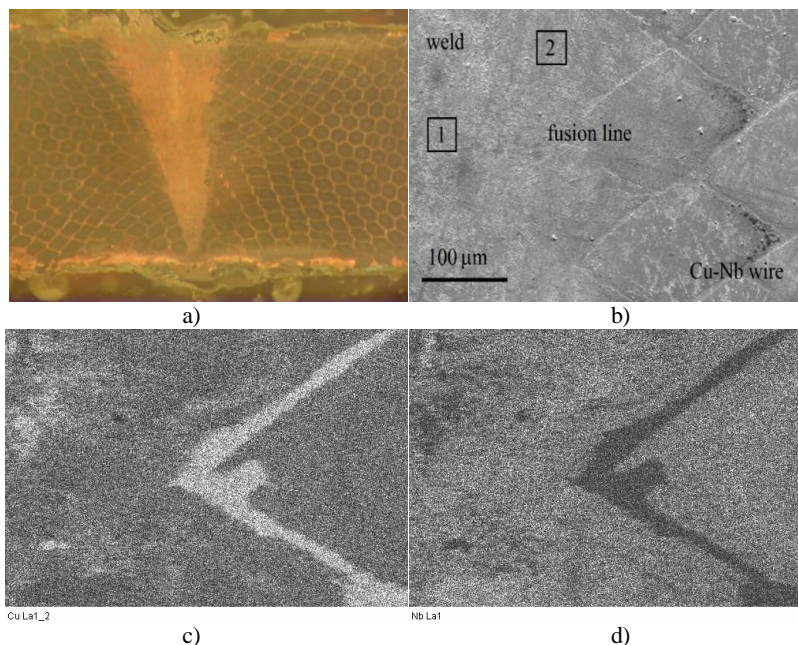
The structure of the joint welded without filling material (autogenous welding): a) laser penetration depth after welding on one side; b) magnified SEM image of the microstructure near the interface between wire and weld; 1 and 2 – marked EDS areas; c) distribution of Cu element in weld area and fusion line; d) distribution of Nb element in weld area and fusion line
